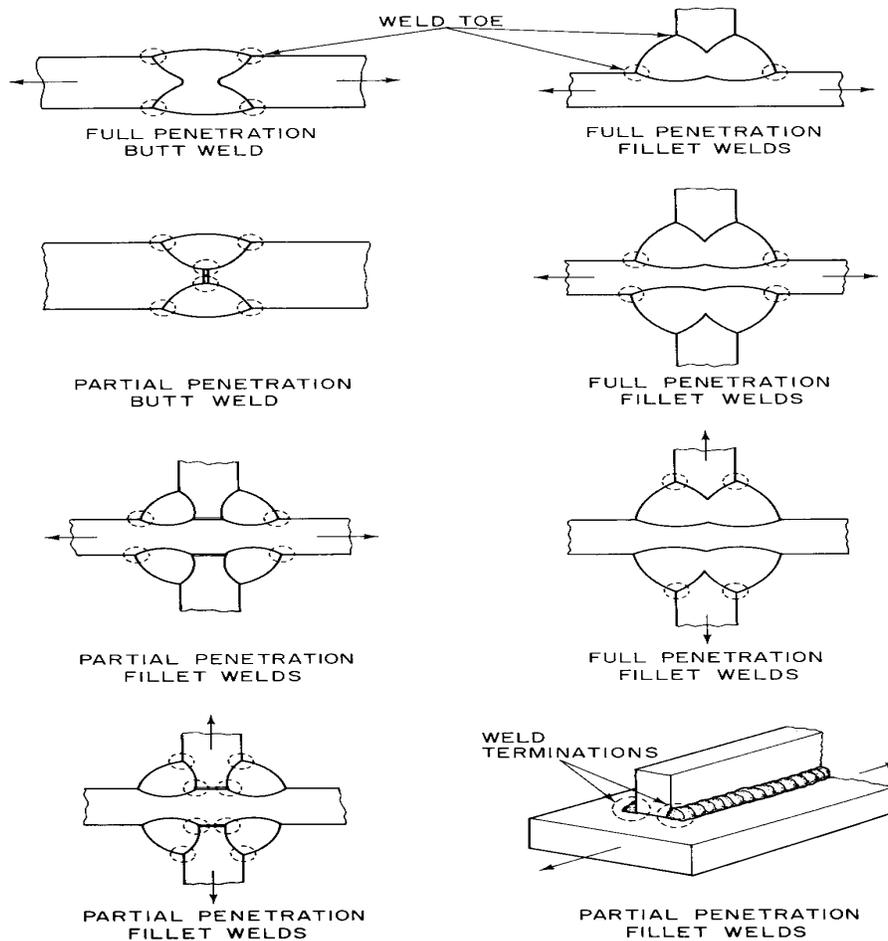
Stress Concentration Locations In Typical Welded Joints
